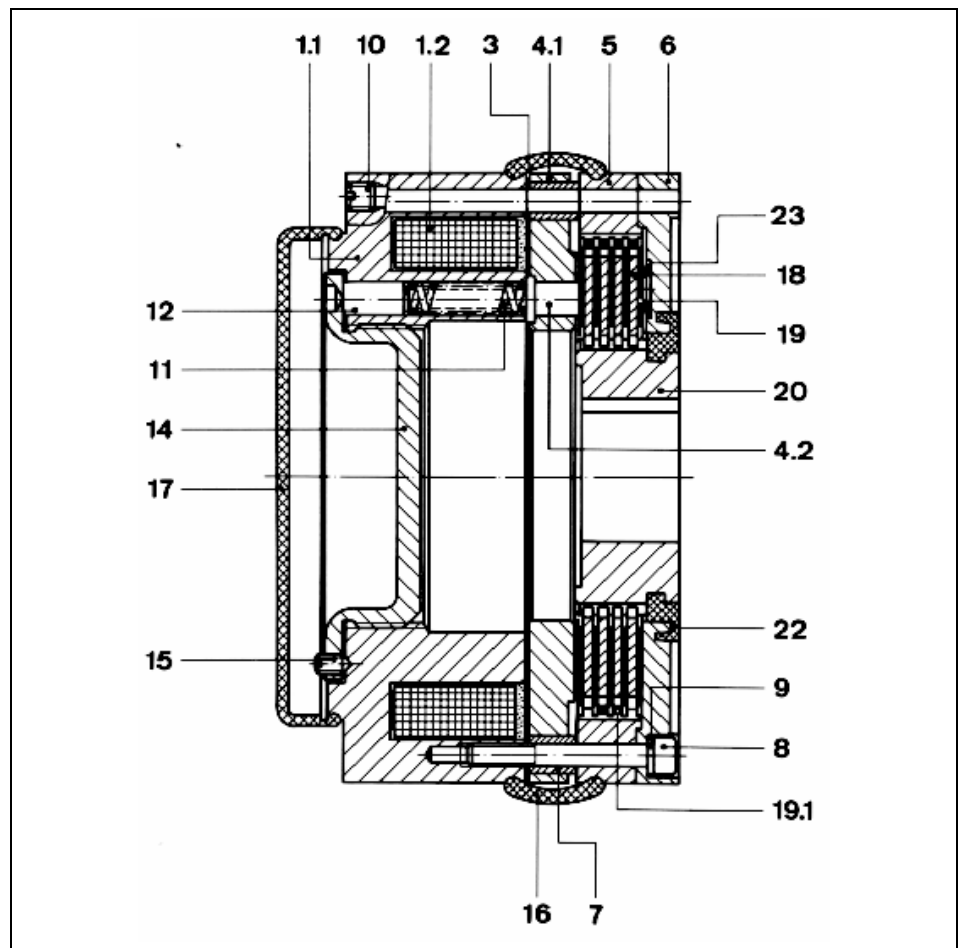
Multiple-disc spring-loaded brake with D.C. solenoid release; type series 71/72 (BINDER)
